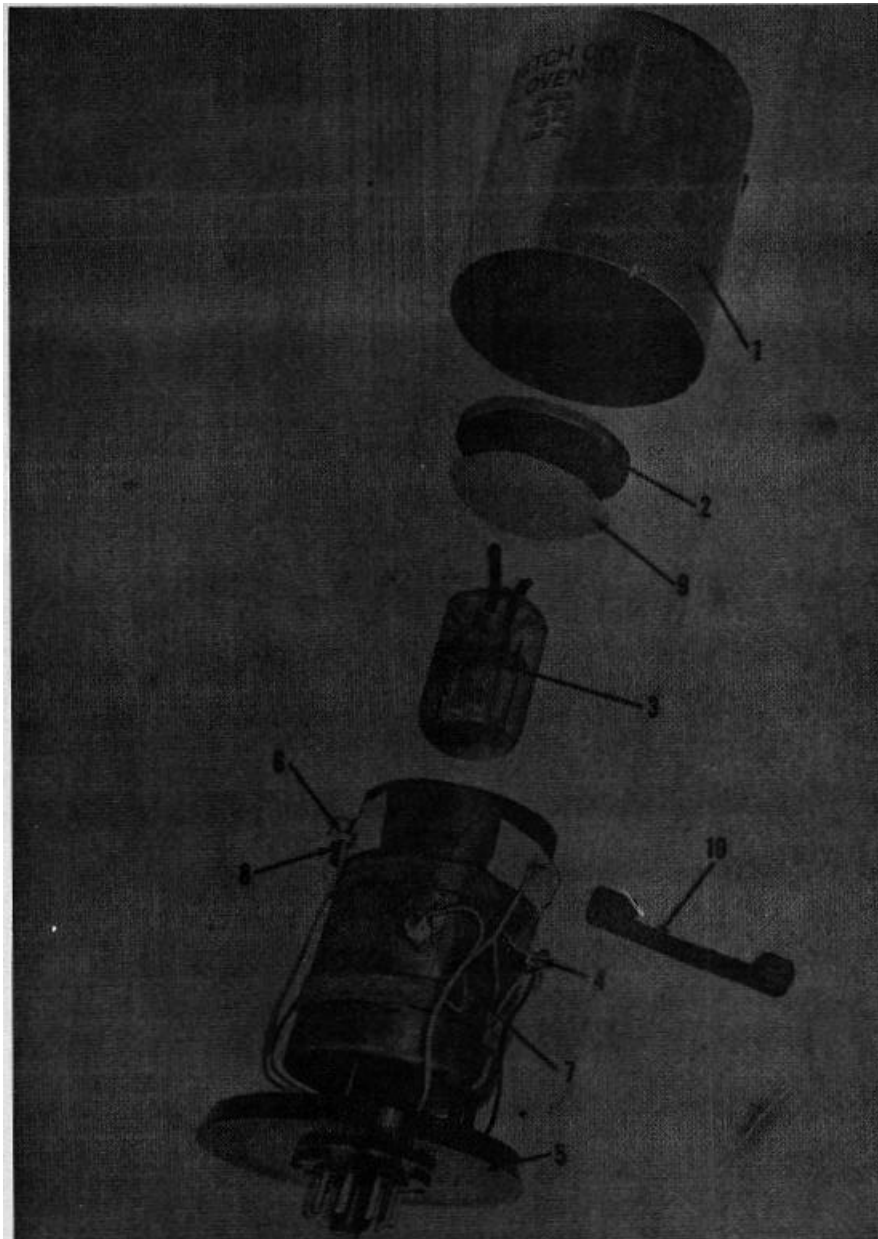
A Exploded View of Crystal Oven, FR-38C/U and FR-38D/U
